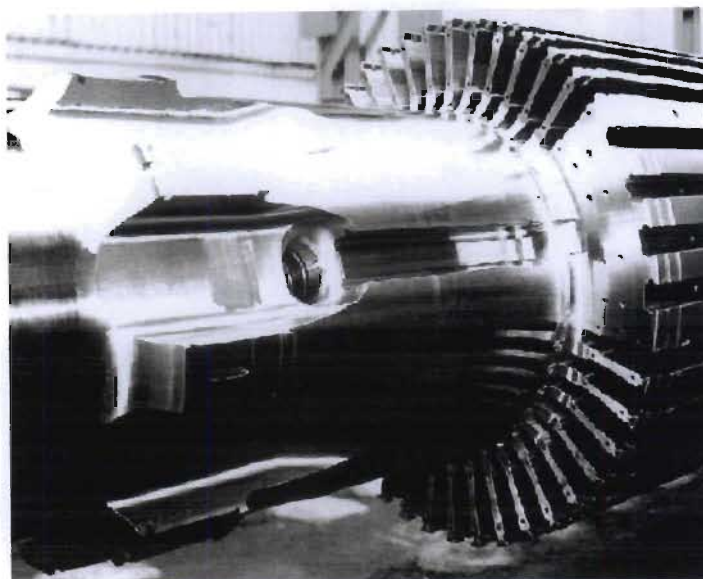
Final machined forging showing rotor teeth (Alstom)
